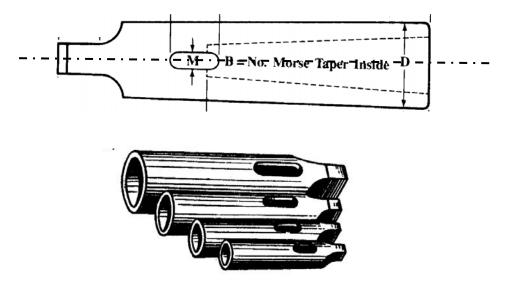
Drill socket for mounting drill chuck and taper shank drills in spindle
